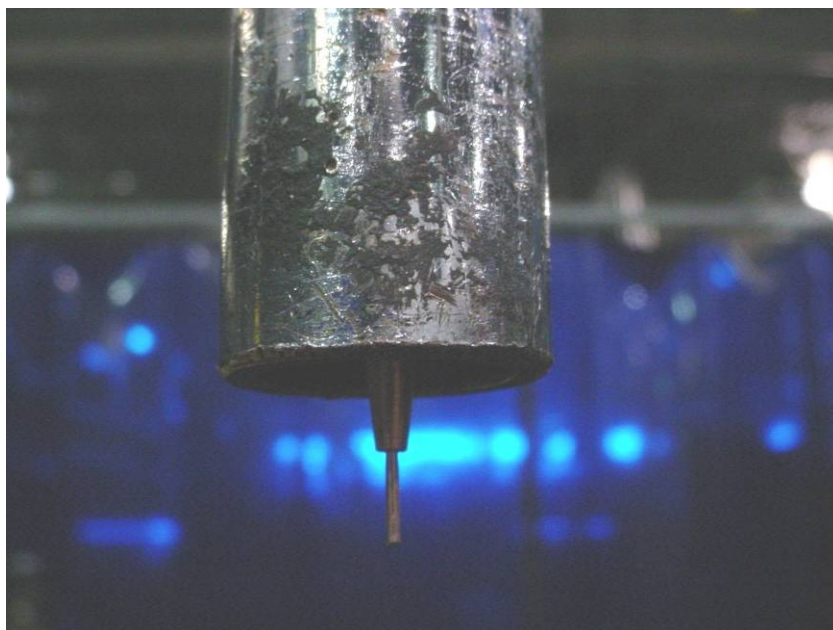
Setup of Contact Tip and Gas Nozzle Showing Wire Extension
